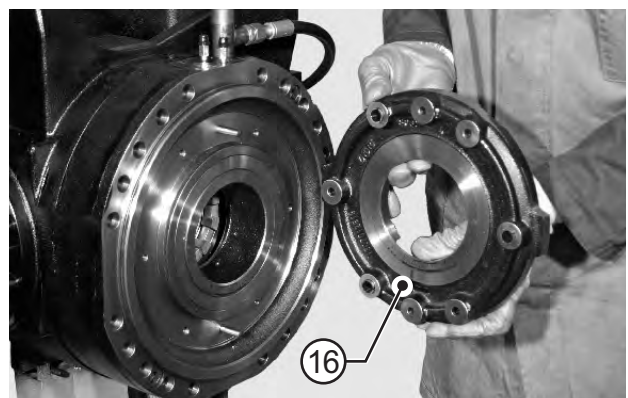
Write down the order of assembly and remove the counterwasher (16).
